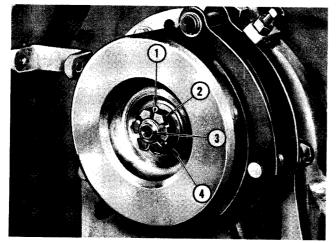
BRAKE DRUM AND OUTER SHOE 1. Cotter 2. Nut 3. Drive Shaft 4. Flat Washer
